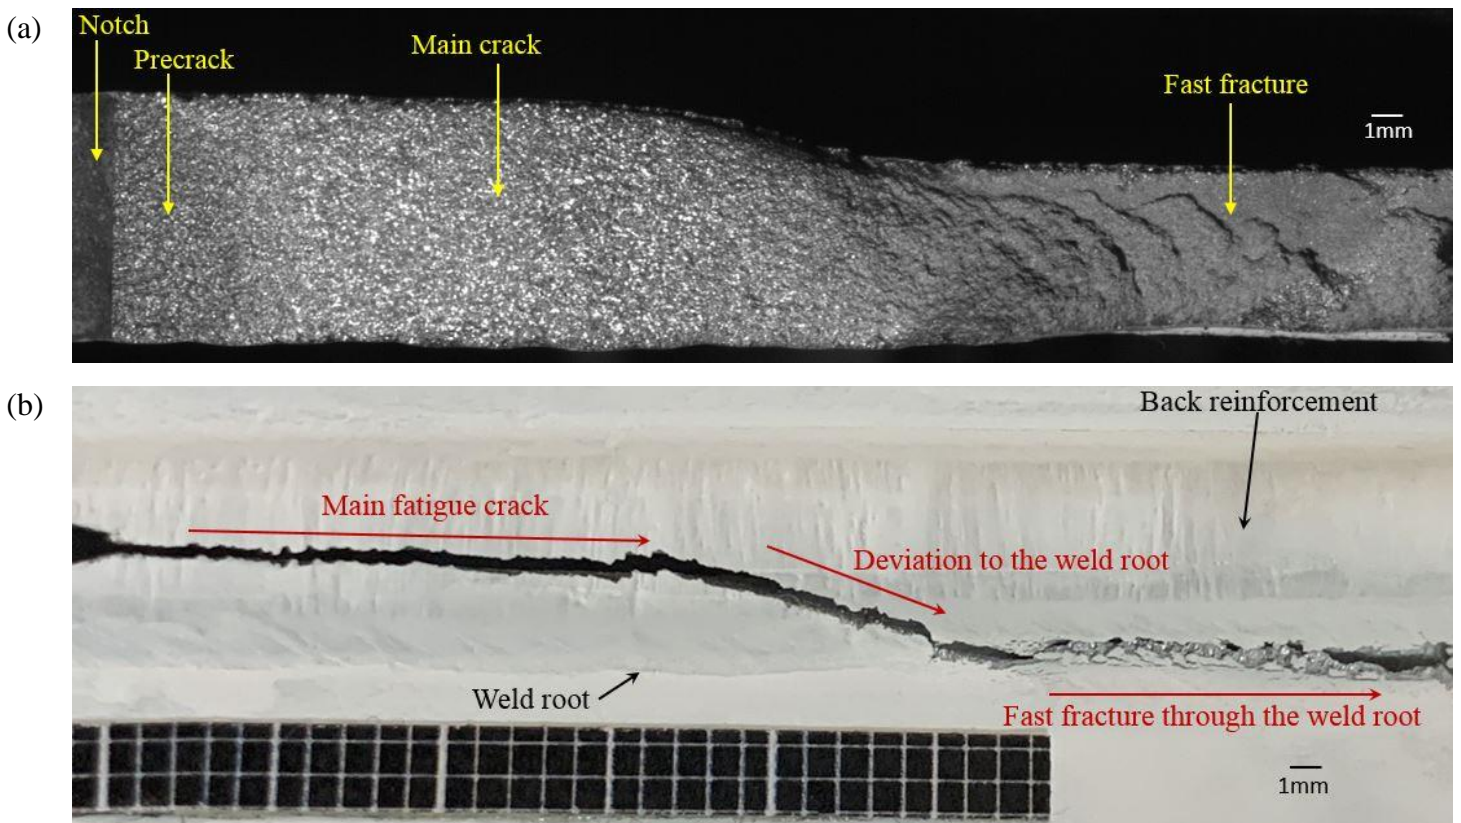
Fracture surface of WM-HT specimen (a) top view (b) back view
